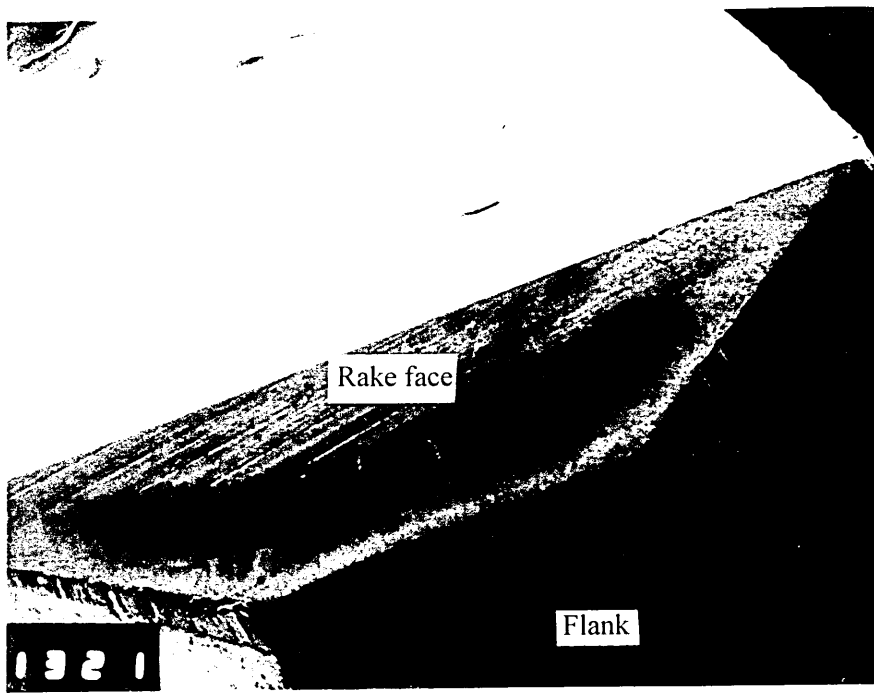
Crater wear and flank wear produced when sawing mild steel with segment type A1
